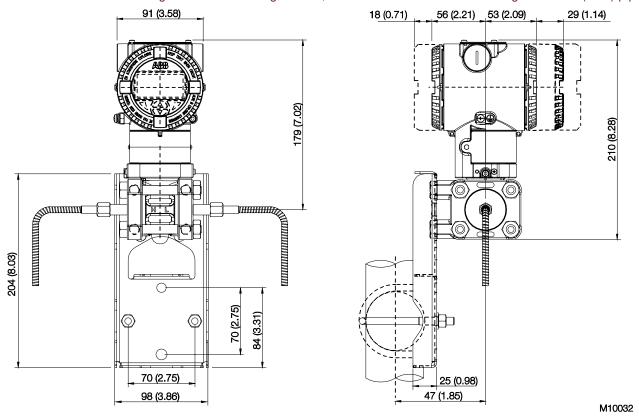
Dimensions - Barrel housing with flush mounting bracket for vertical or horizontal mounting on 60 mm (2 in.) pipe
